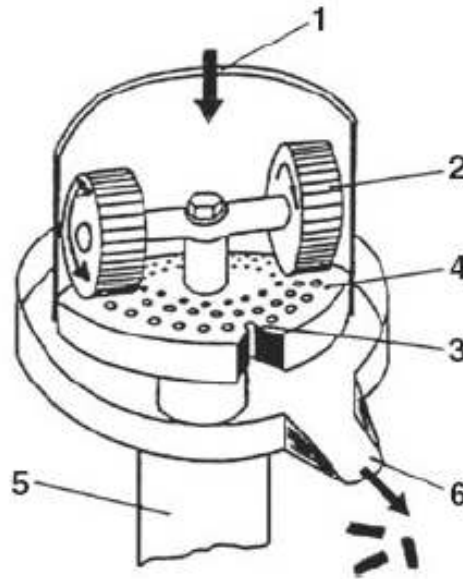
Matrix granule extruder with horizontal matrix and rolling wheels (Pastorek et al., 2004) (1. insertion of crushed straw, 2. extrusion wheel, 3. matrix openings, 4. horizontal matrix, 5. transmission and electric motor, 6. removal of pellets)
